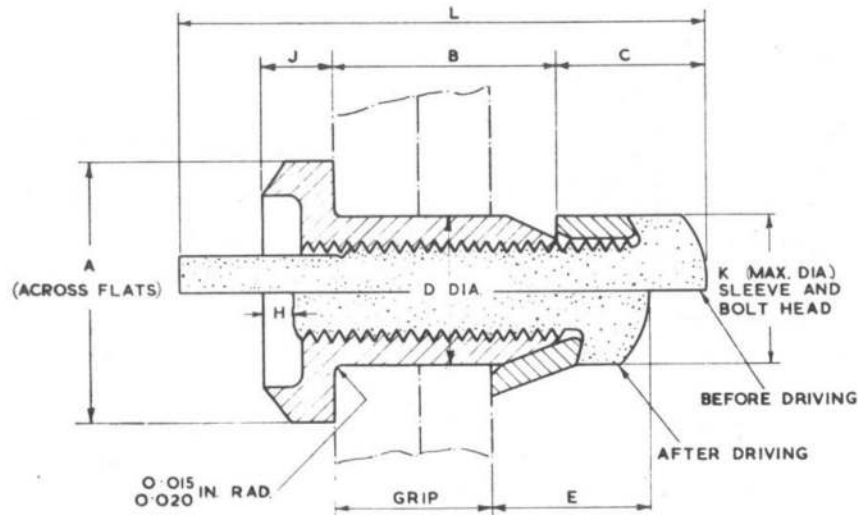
Hexagon-headed Jo-bolt, general dimensions
